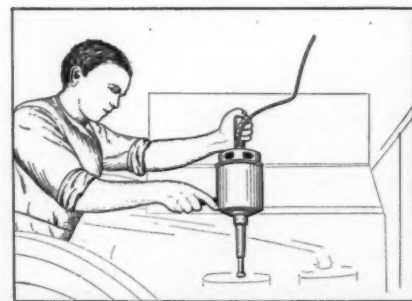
Showing an operator using the portable electric machine for grinding in the valves
